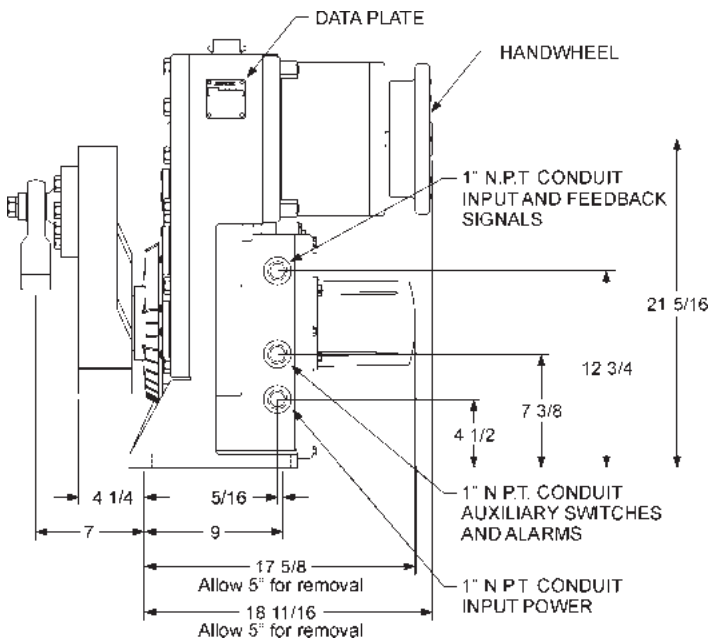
Models 22-309, 22-409 Outline Dimension Drawings
